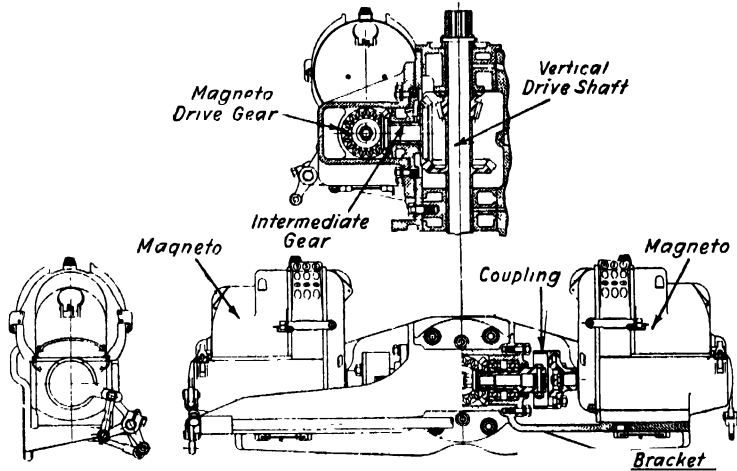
Magneto Drive Assembly of Packard Aircraft Engines, Models 2A-1500 and 2A-2500.
